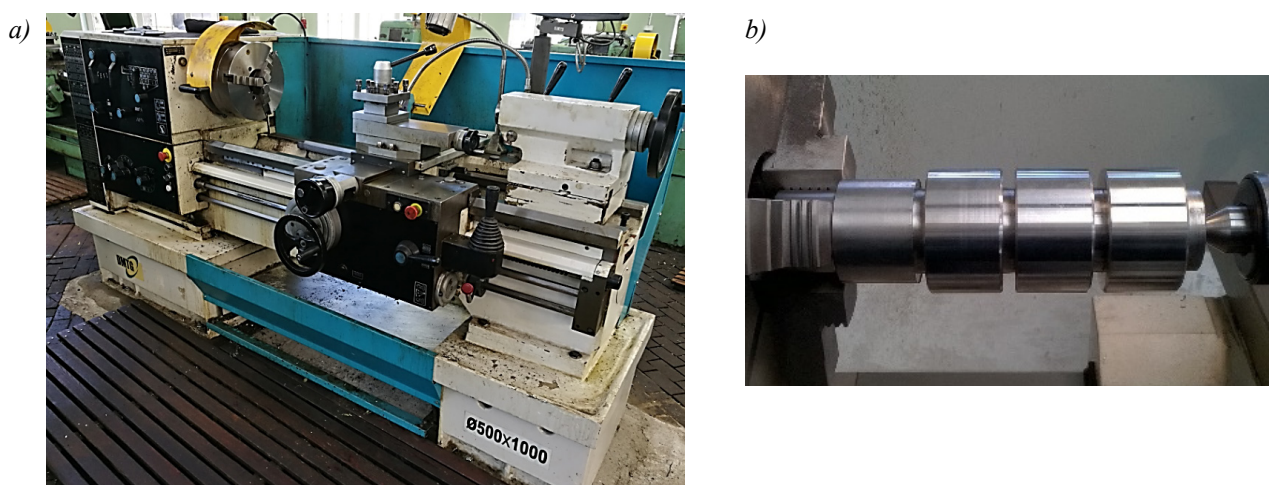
a) Lathe type: CDS 6250 BX-1000 b) the sample used for turning process
